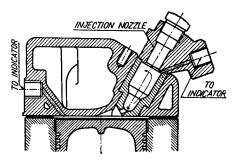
Section through the combustion chamber of the experimental Diesel engine.
